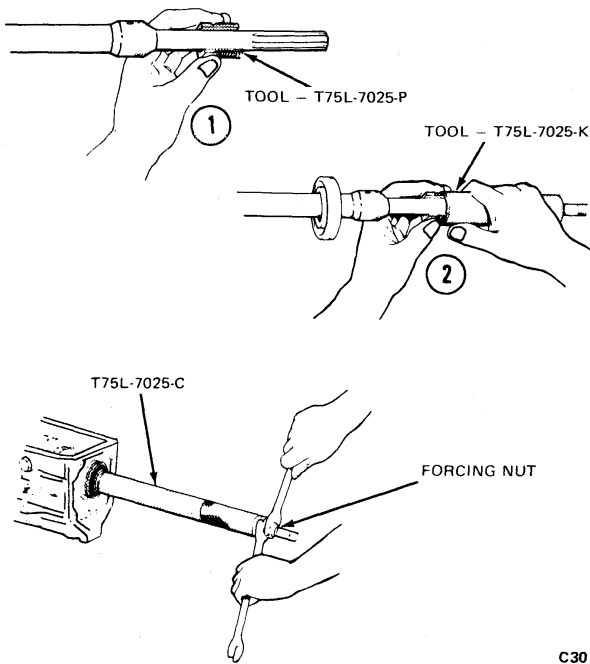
Installing Output Shaft Bearing—Typical Transmission
